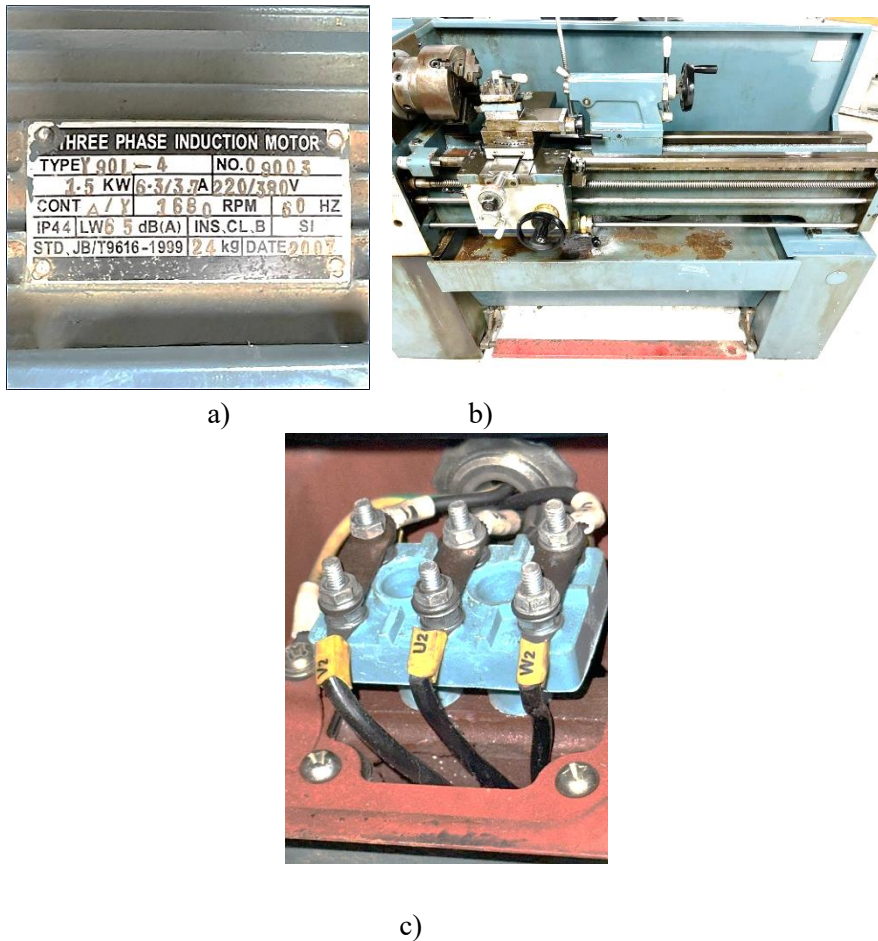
a) Motor specification, b) Center lathe machine, c) Delta motor connection before 2.1.2 Grinding Machine:
